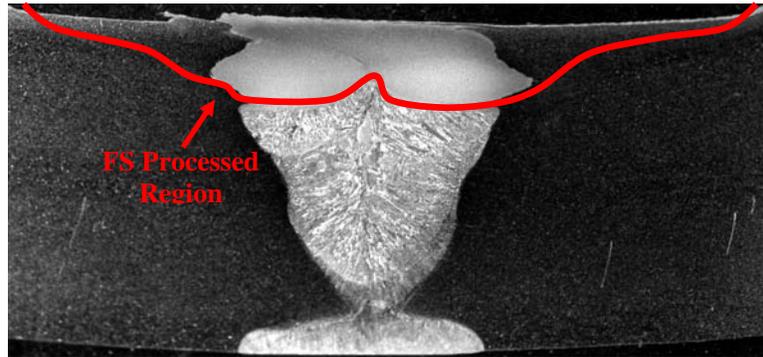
Macrograph of FS Processed Arc Weld
